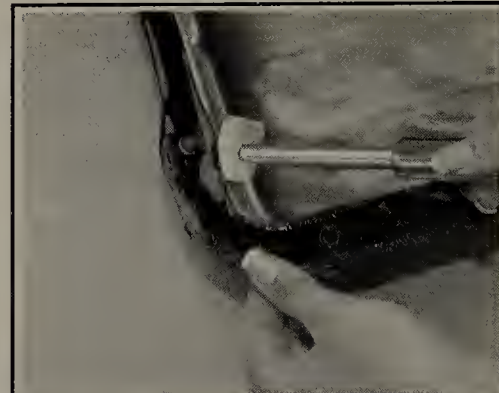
Remove and discard the pan gasket, then use a suitable scraper to carefully clean the mating surfaces
